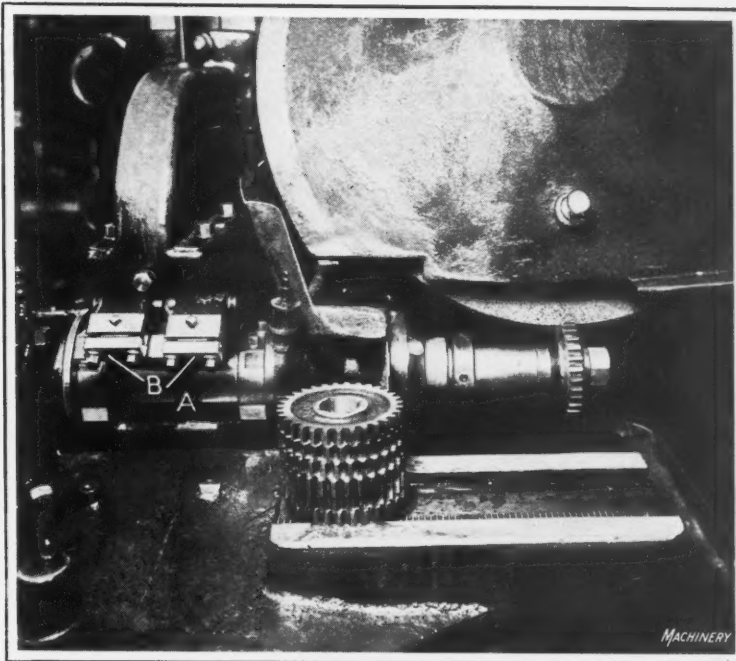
A Gear Grinding Operation on a Machine of the Same Type as that shown in Fig. 5
